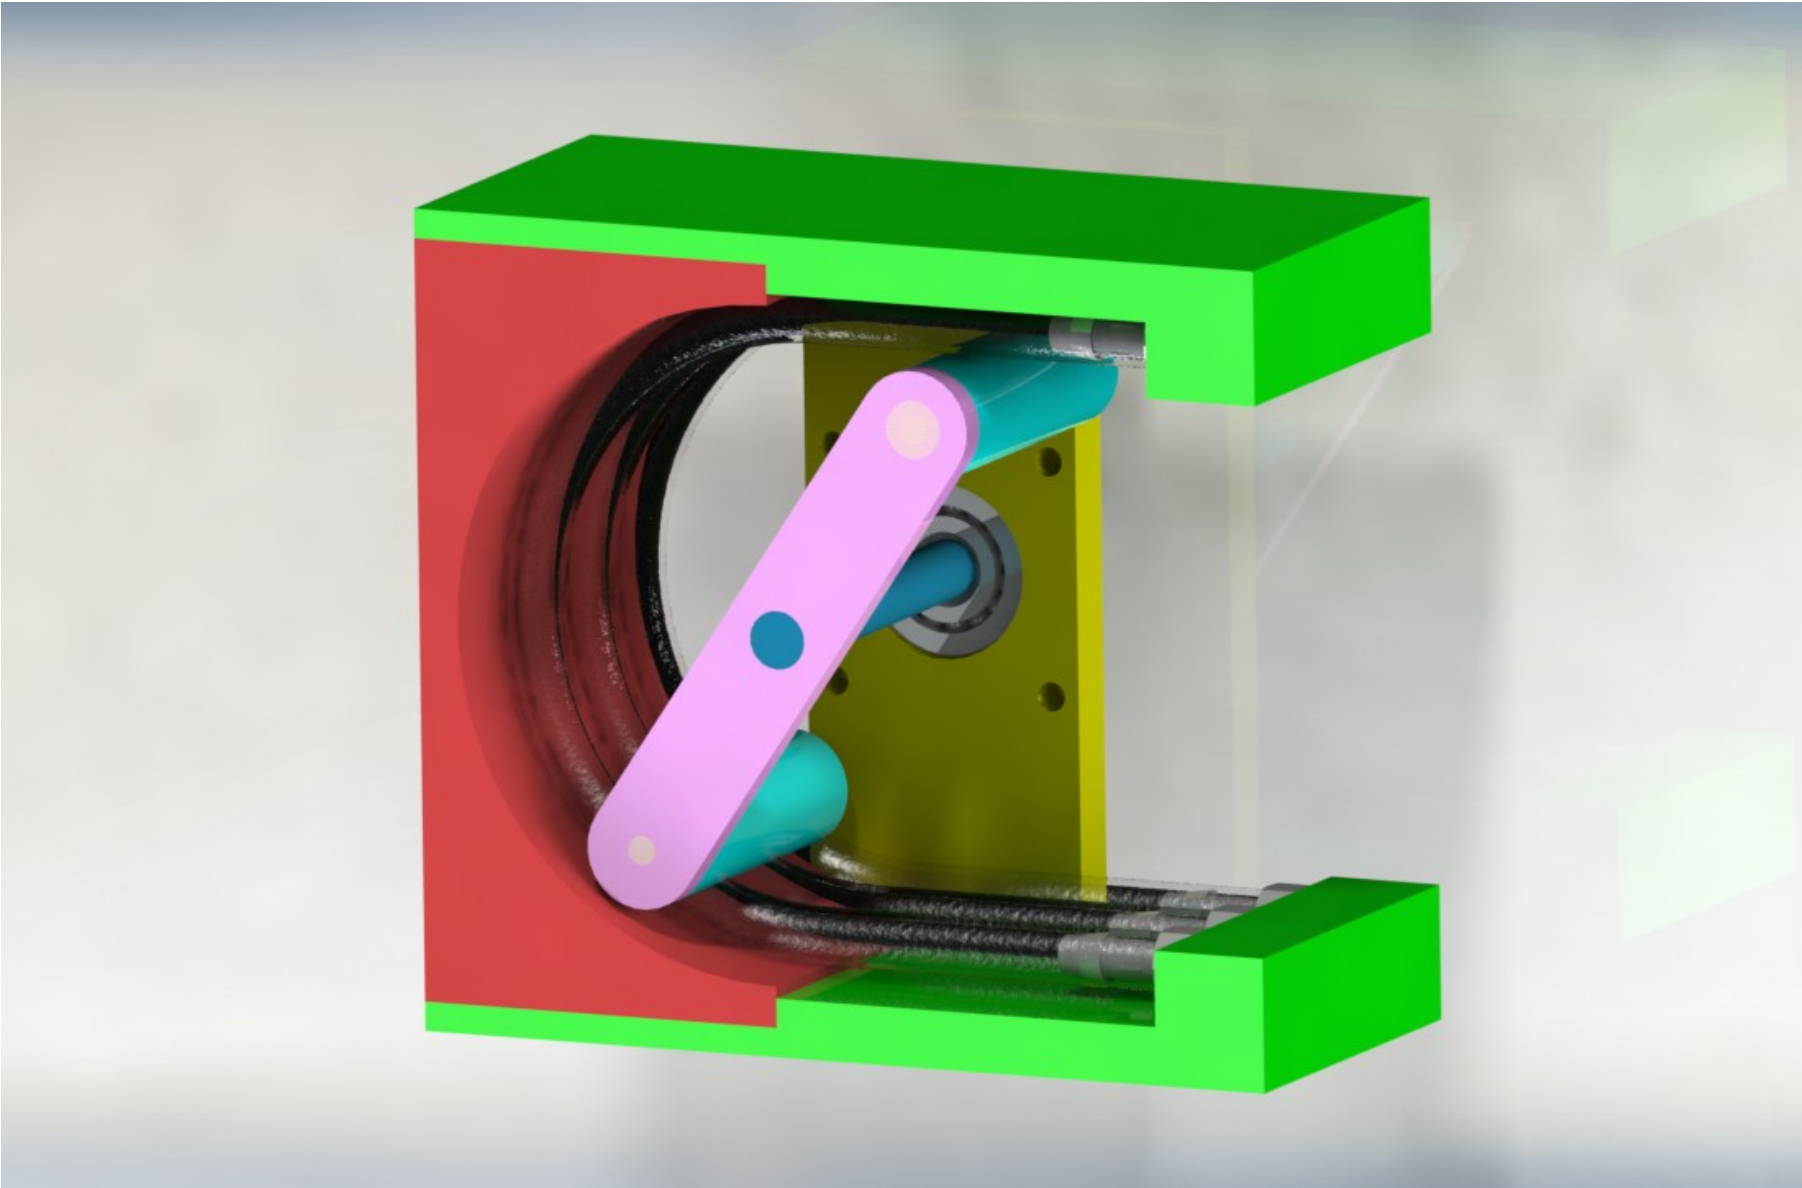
Front Tube Fitting Plate*. This plate will have holes threaded as shown that will contain the tube fittings on both sides in order to hold all the peristaltic tubes that will be used and connect them directly to the incoming and outgoing tubes so that leakage is minimized. These might be changed in order to reduce material however.
